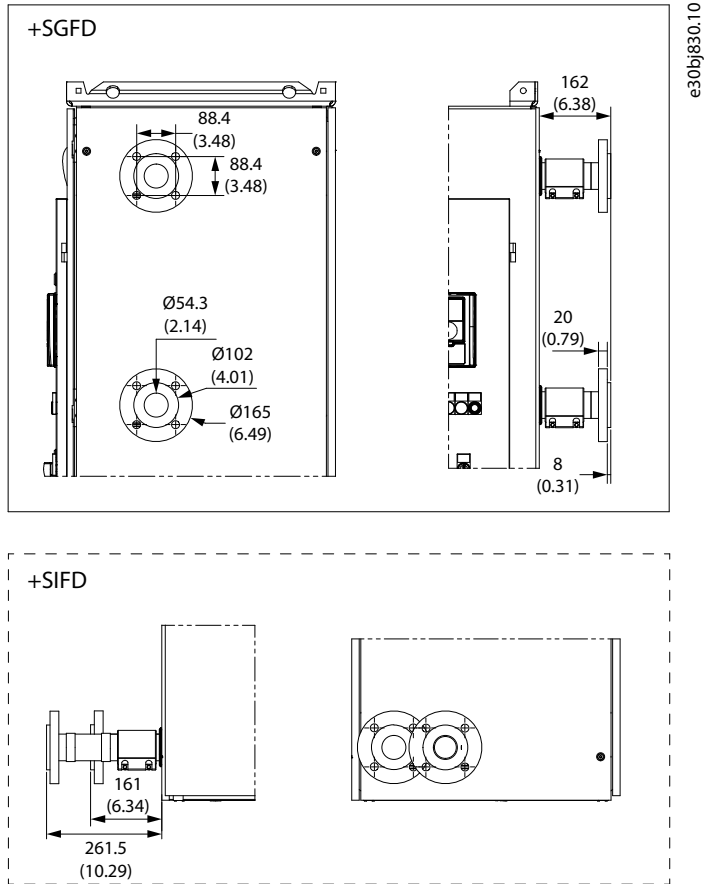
Dimensions of the Optional DIN Flanges, +SGFD and +SIFD, in mm (in)
